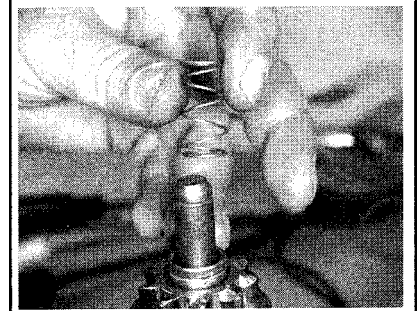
With the snapping and cup removed, lift the spring and lower cup/spacer from the armature shaft
